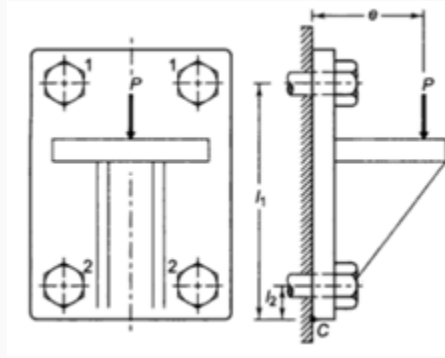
Eccentric load acting perpendicular to the plane of bolts
